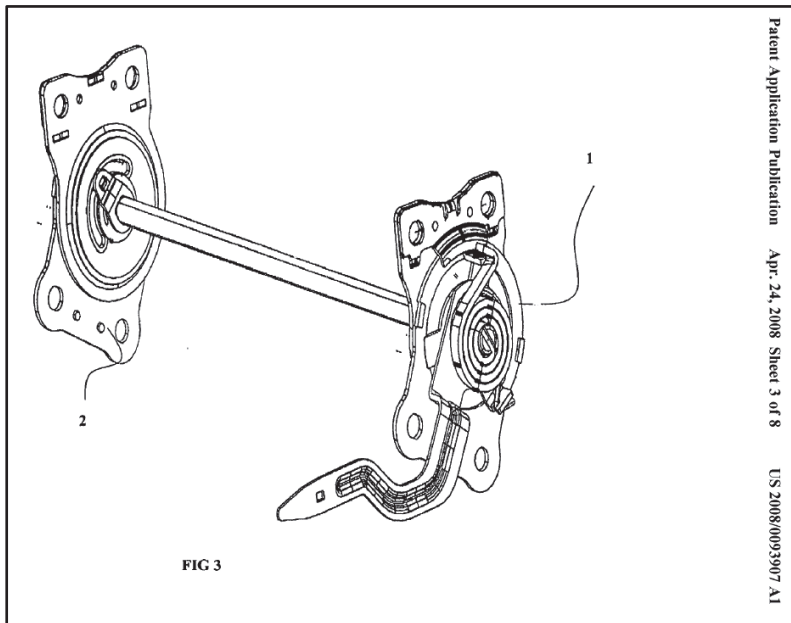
Drawing of dual recliner system with pawl and sector gears and connecting rod [4].
